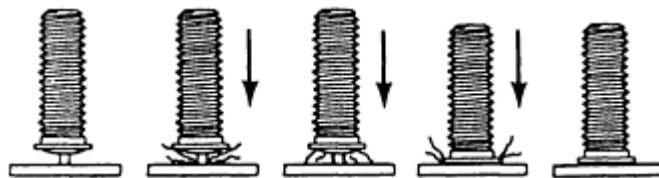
INITIAL-CONTACT CD STUD WELDING. SEE TEXT FOR EXPLANATION. SOURCE: REF 1
